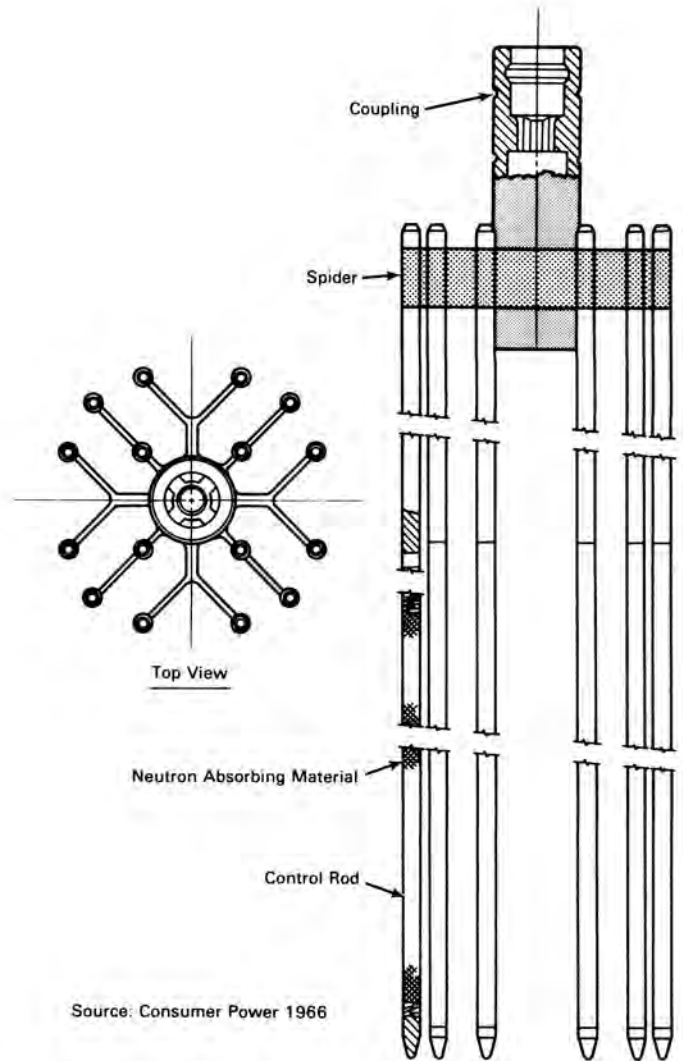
Babcock and Wilcox Control Rod Assembly.
